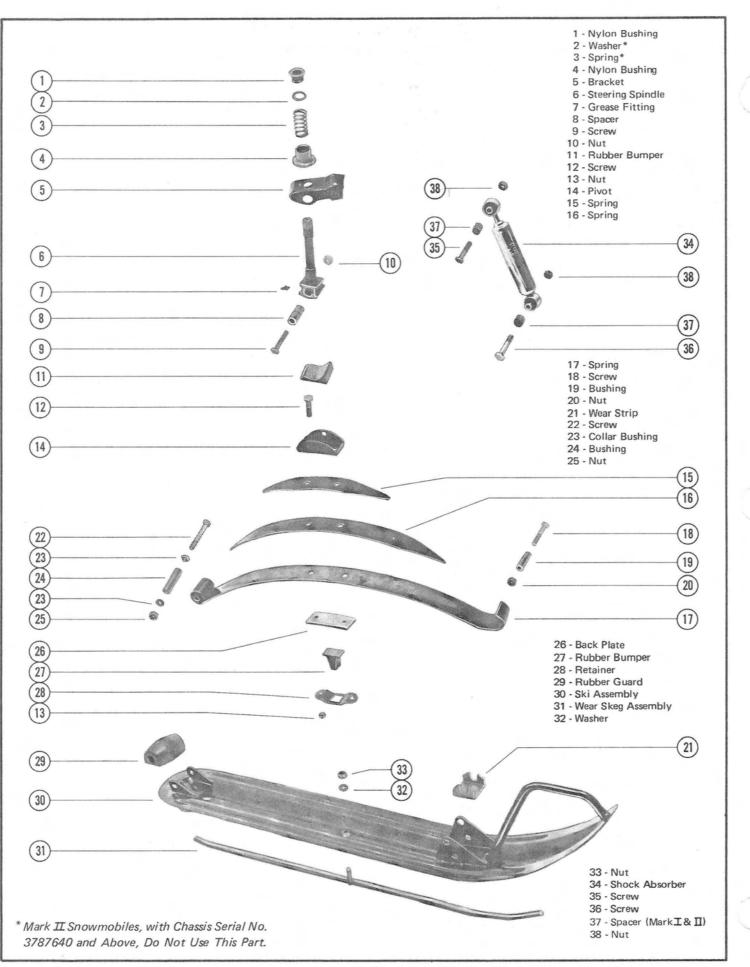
Ski, Spring and Spindle Components for Hurricane, Mark I and Mark II (644cc) Models
